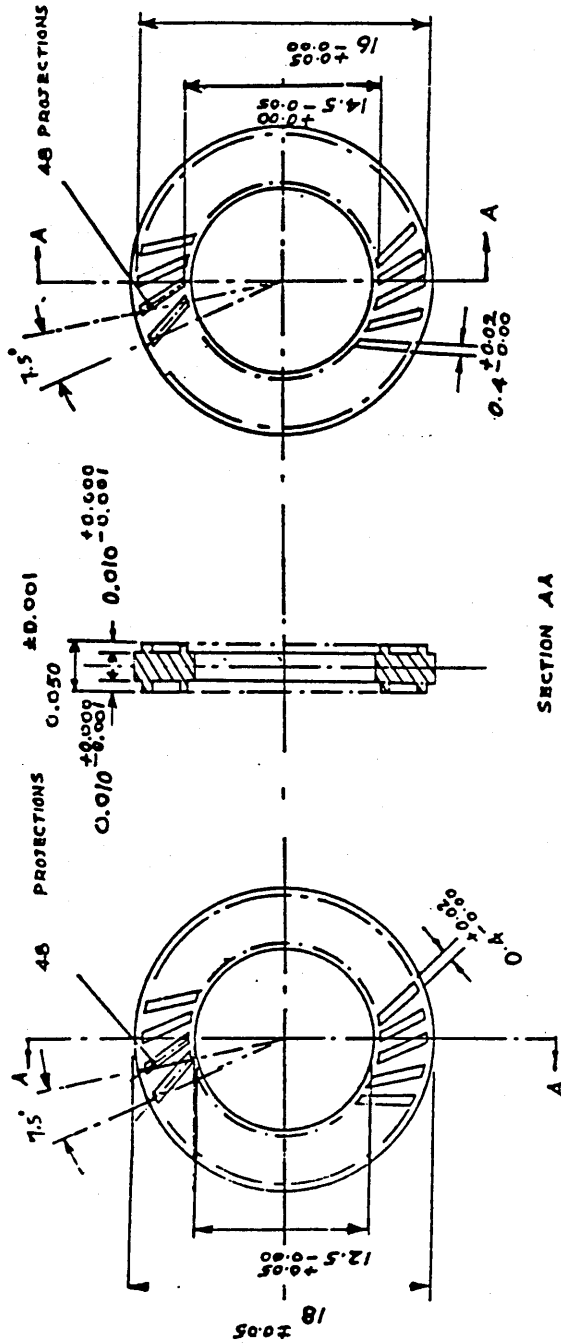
DIMENSIONS OF THE EDGE FILTER PRODUCED BY E.P.E.
